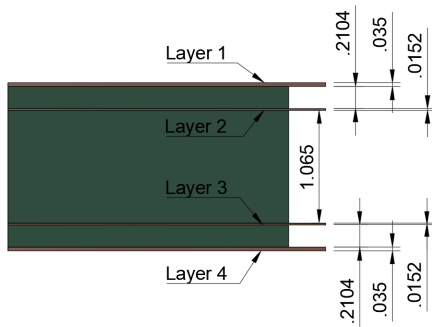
Cross section of the PCB showing the different layers that compose it. All units are in millimeters.
